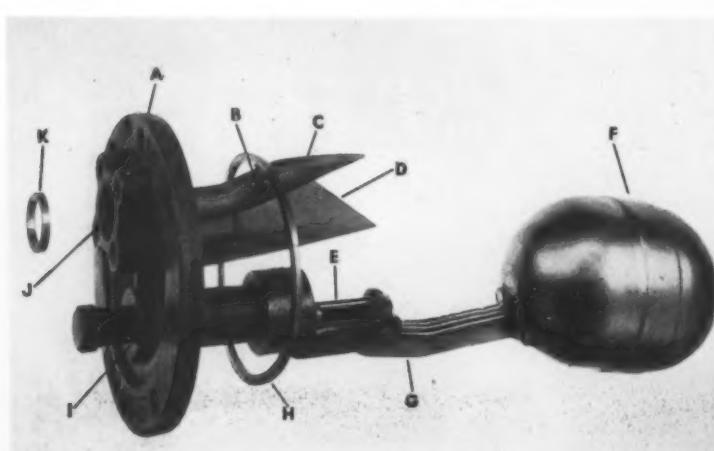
Exposed view of float valve for soda fountain application. (A) Header plate; (B) oil return hole; (C) suction tube; (D) baffle plate; (E) needle valve; (F) float ball; (G) float ball arm; (H) header gasket; (I) liquid valve connection; (J) suction valve connection; (K) suction valve gasket.
